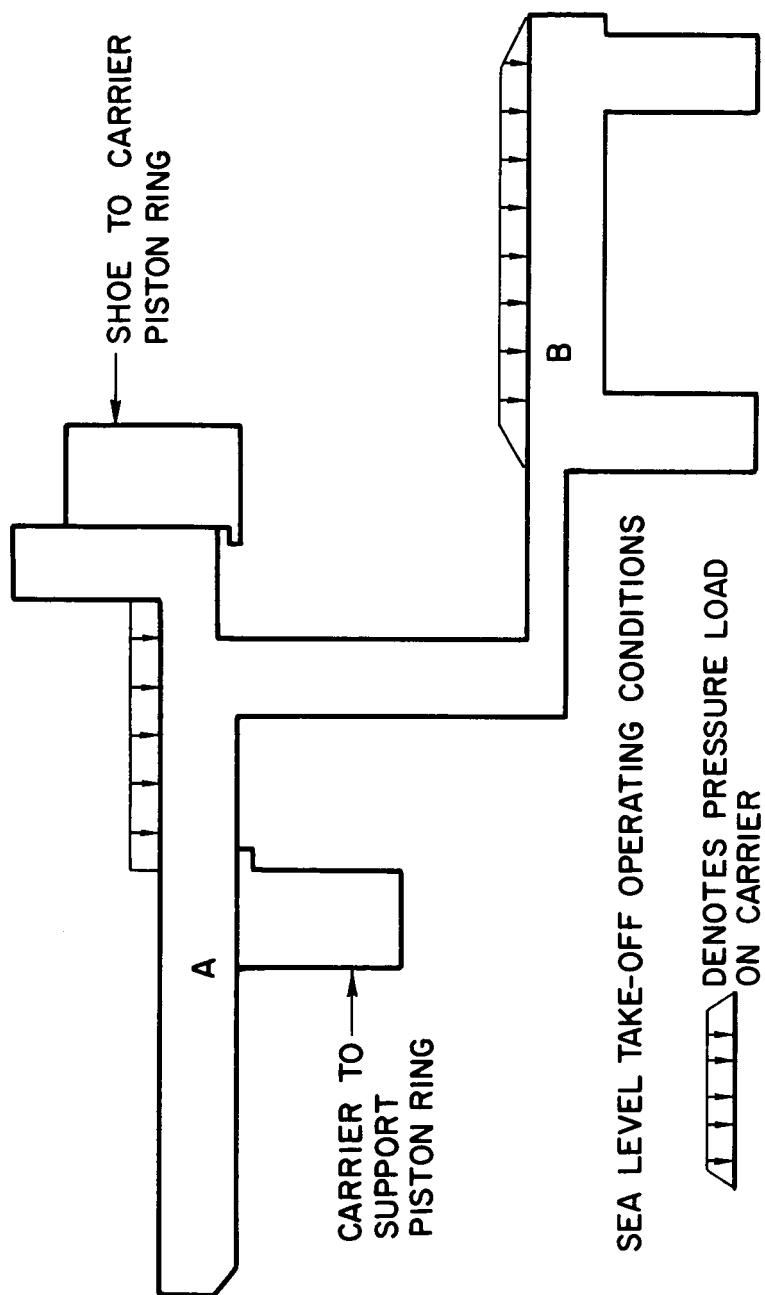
Seal Carrier Deflection with Piston Ring Groove in Seal Support and Carrier at Outer Extreme of the 0.4" Axial Travel
